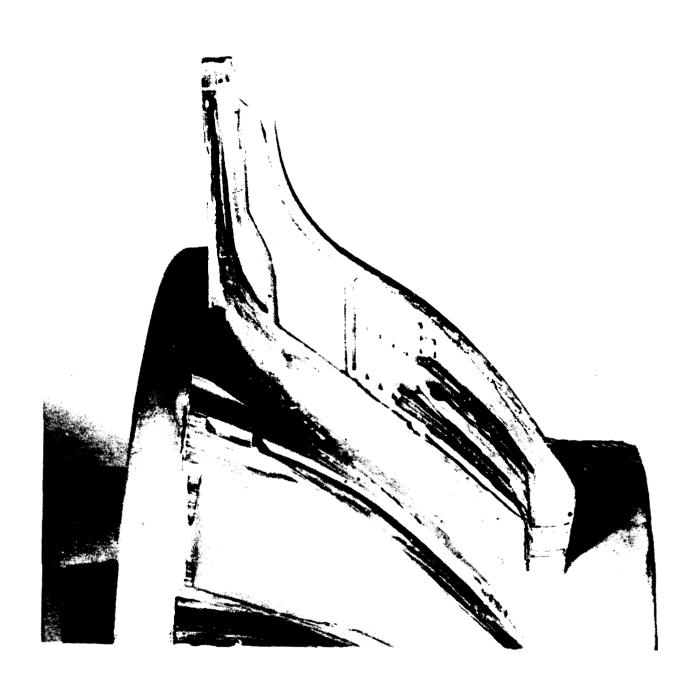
SECTIONED CASTING, PRESSURE SIDE
